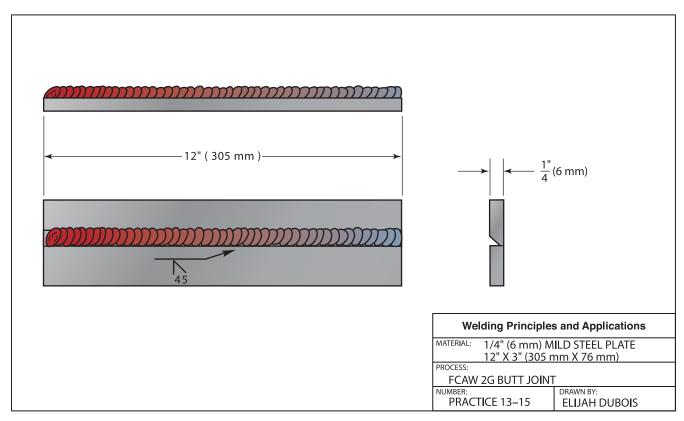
FCAW 2G butt joint, 1/4-in. (6-mm) mild steel.
